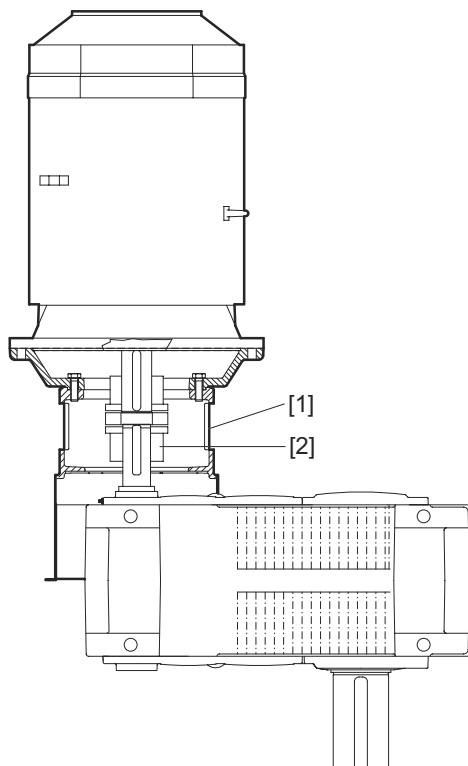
Motor adapter for MC.P.. industrial gear units 51594AXX
